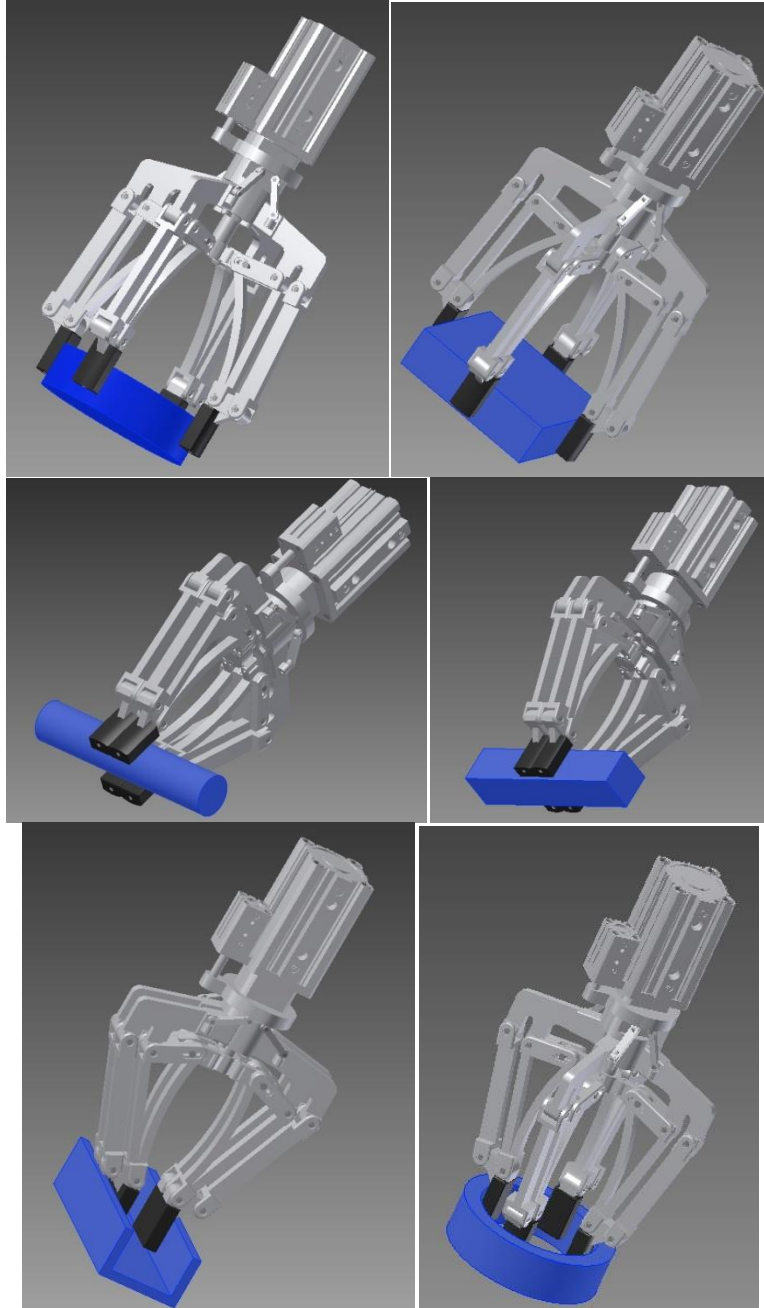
Types of workpiece manipulated with the help of gripper.
